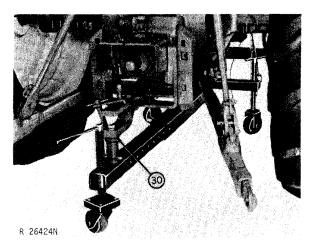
Attaching JDG-2M Rear Splitting Stand
